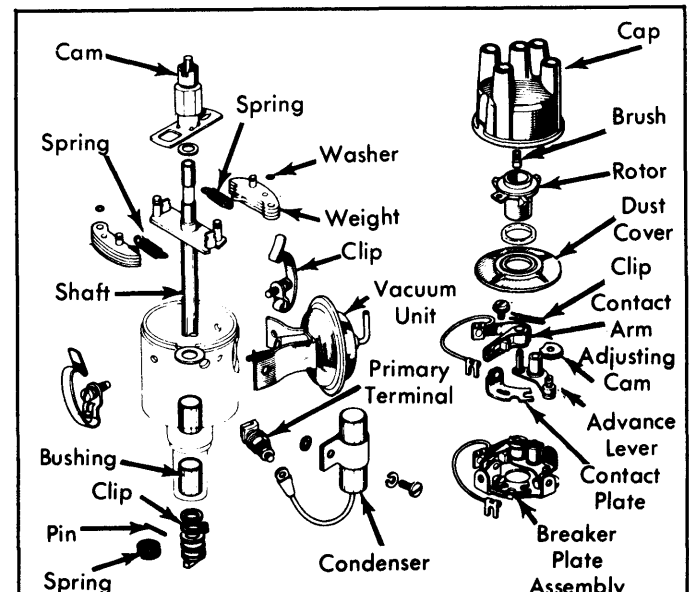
Ducellier Distributor (Vacuum Advance Version Shown)
